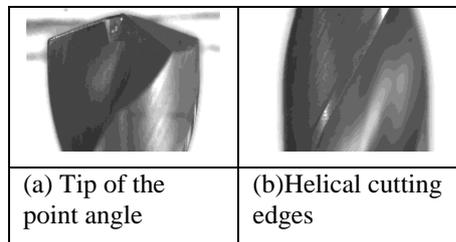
Micrograph showing wears at (a) tip of the point angle (b) helical cutting edge after drilling 36 holes.
